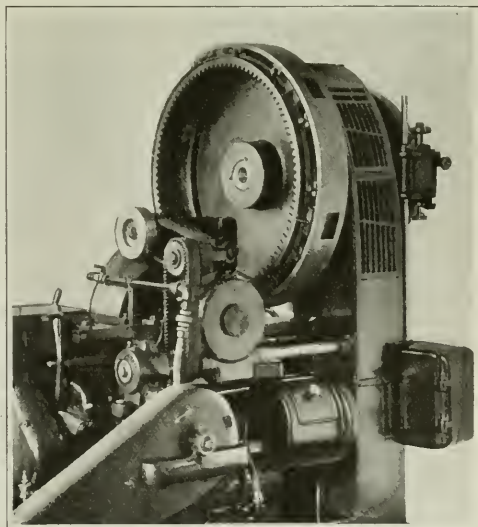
Guards removed to show Chain Drive of Internal Attachment illustrated in Fig. 3
